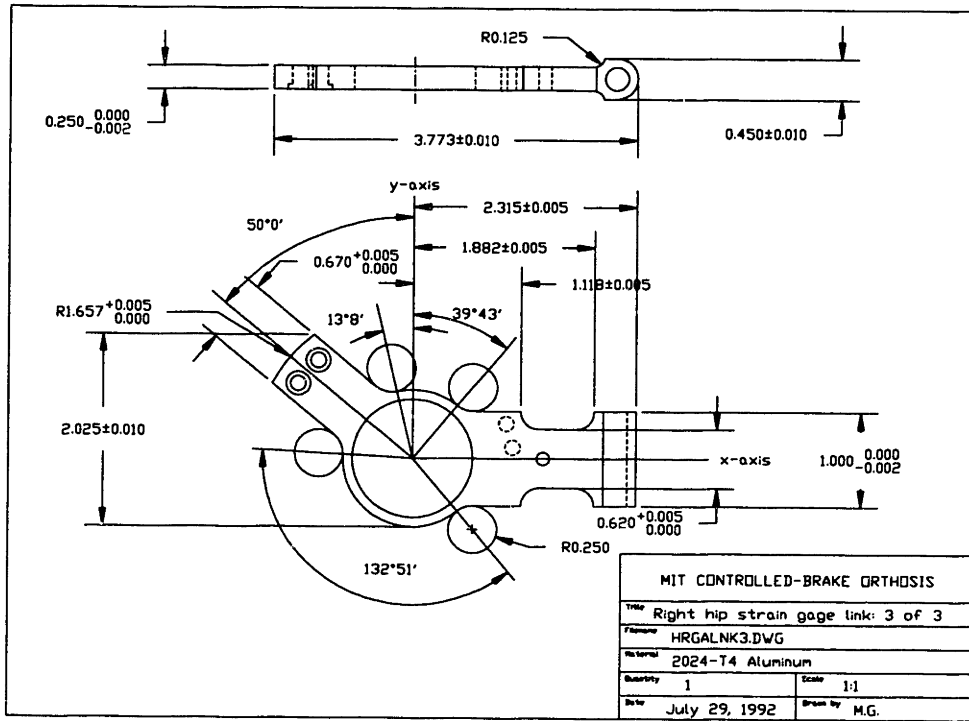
Link that couples right hip gear to the brace (drawing 3 of 3).
